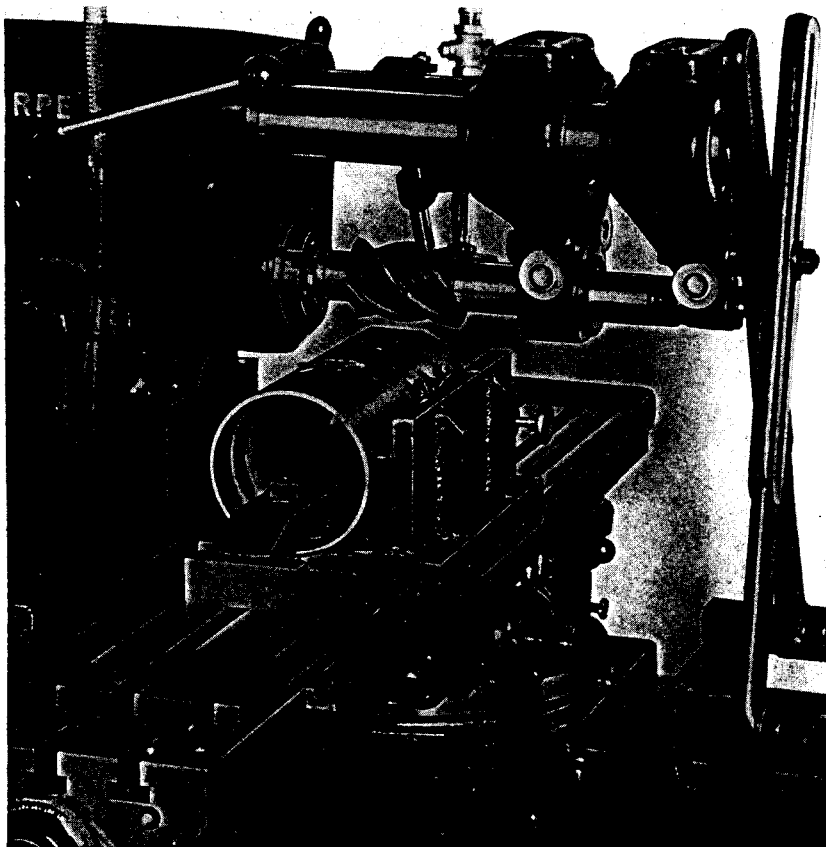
This cylindrical part is securely clamped in the fixture at both ends before milling the flat shown. Since accuracy and good finish are called for in this job, rigid cutter support is essential; and this is obtained as follows:
